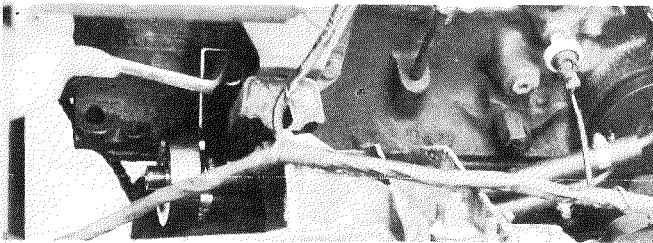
and fit the adaptor using the slightly longer screw and washers - again, supplied with the kit. Note that the hoses pass through the chassis turret. Tighten the hose clips securely. Small nut spinners or sockets are often better than screwdrivers to do this.
